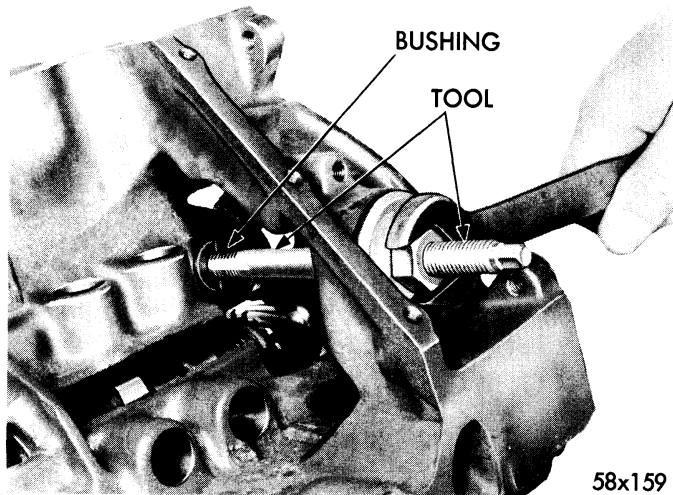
Removing Distributor Drive Shaft Bushing—350 Cubic Inch V-8 Engine
